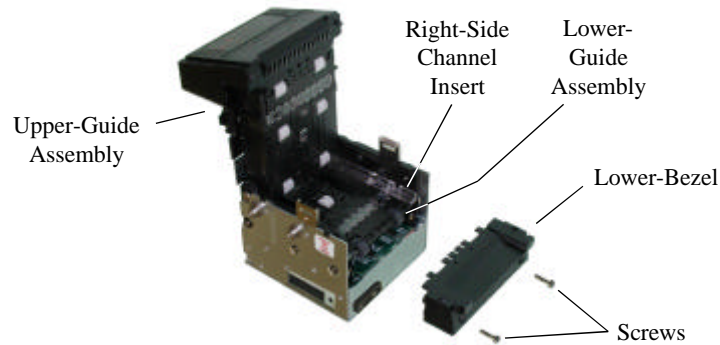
ARGUS-B Validator Head – Lower-Bezel Disassembly
